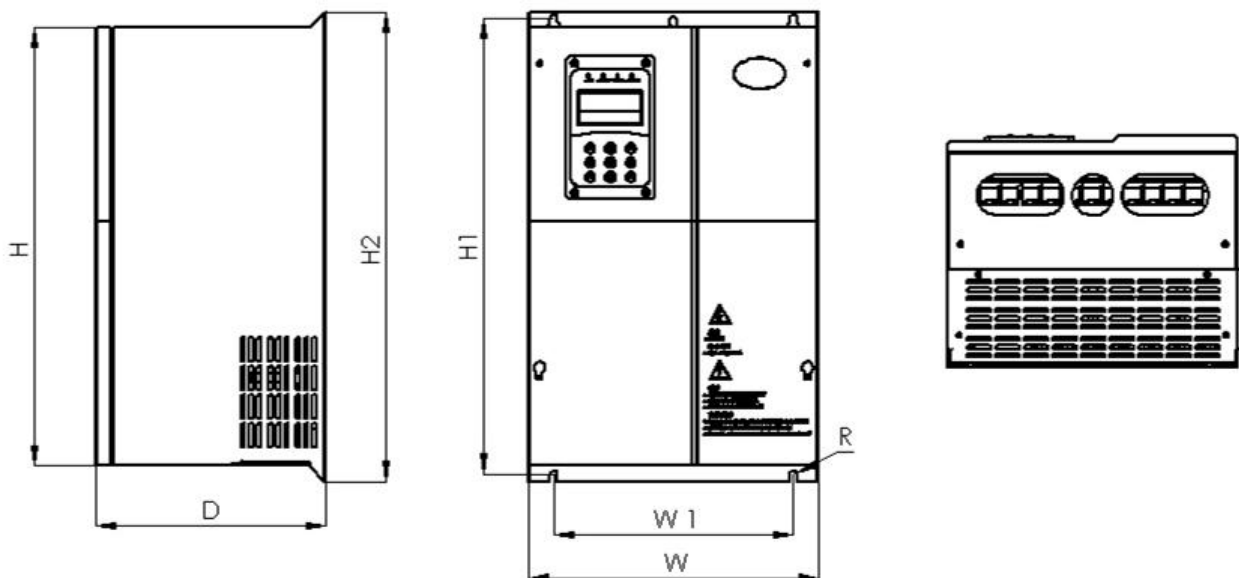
Outline and mounting dimensions of SM22 series 11-90kW
